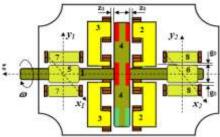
The sectional view of a AFPM with built-in bearings from two sides of the shaft (1: Shaft; 2,3: Stator and windings of the right, the left motor; 4: Permanent magnet rotor of the motor; 5,6: Rotor of the left and the right magnetic bearings; 7,8: Stator and windings of the left, the right magnetic bearings; z<sub>0</sub>. Sominal air gap between rotor and stator of the motor and the magnetic bearings)
